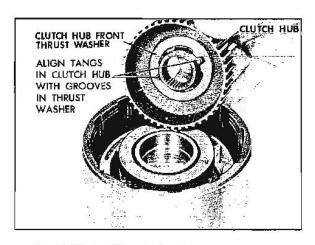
Installing Clutch Hub Front Thrust Washer
